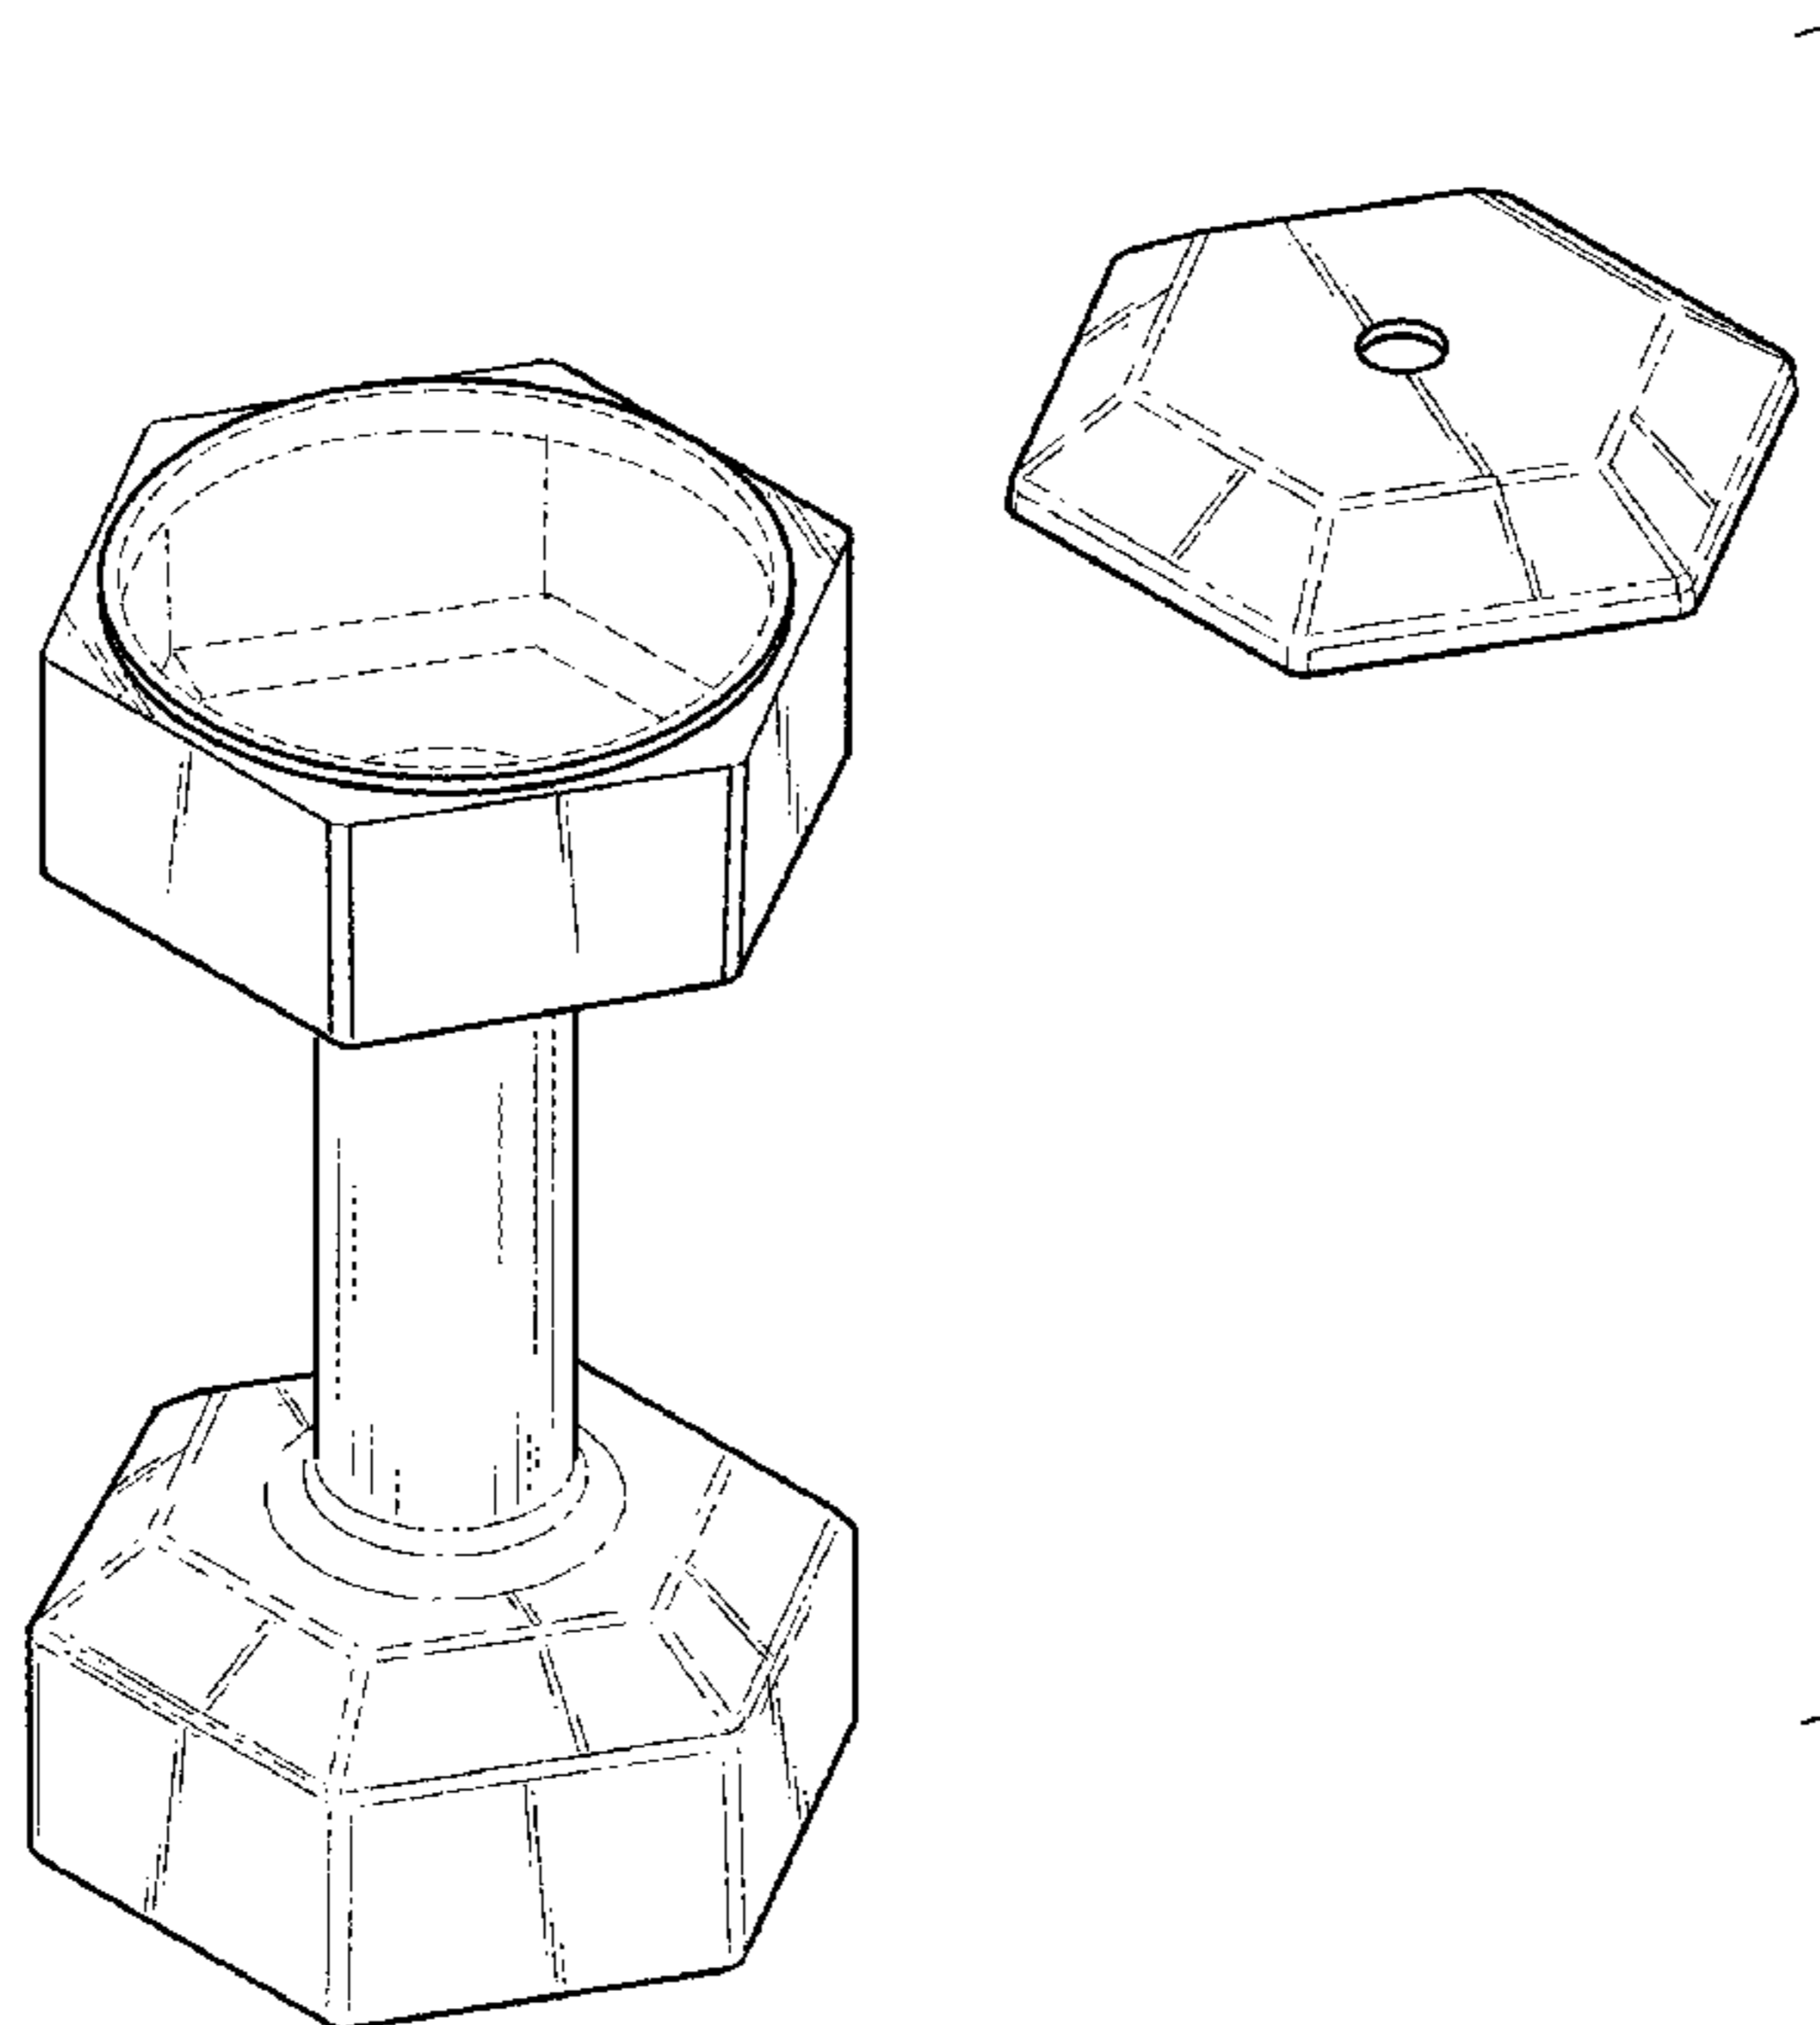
is an exploded right side view of thereof, the exploded left side being a mirror image to the exploded right side;
